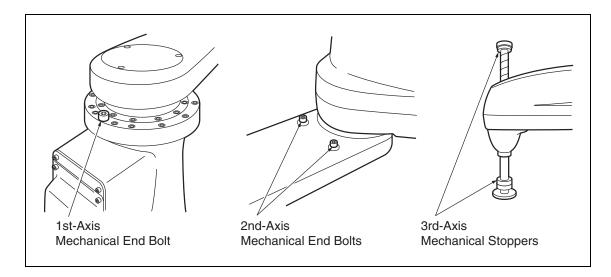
Mechanical End Bolts and Stoppers on Robot
